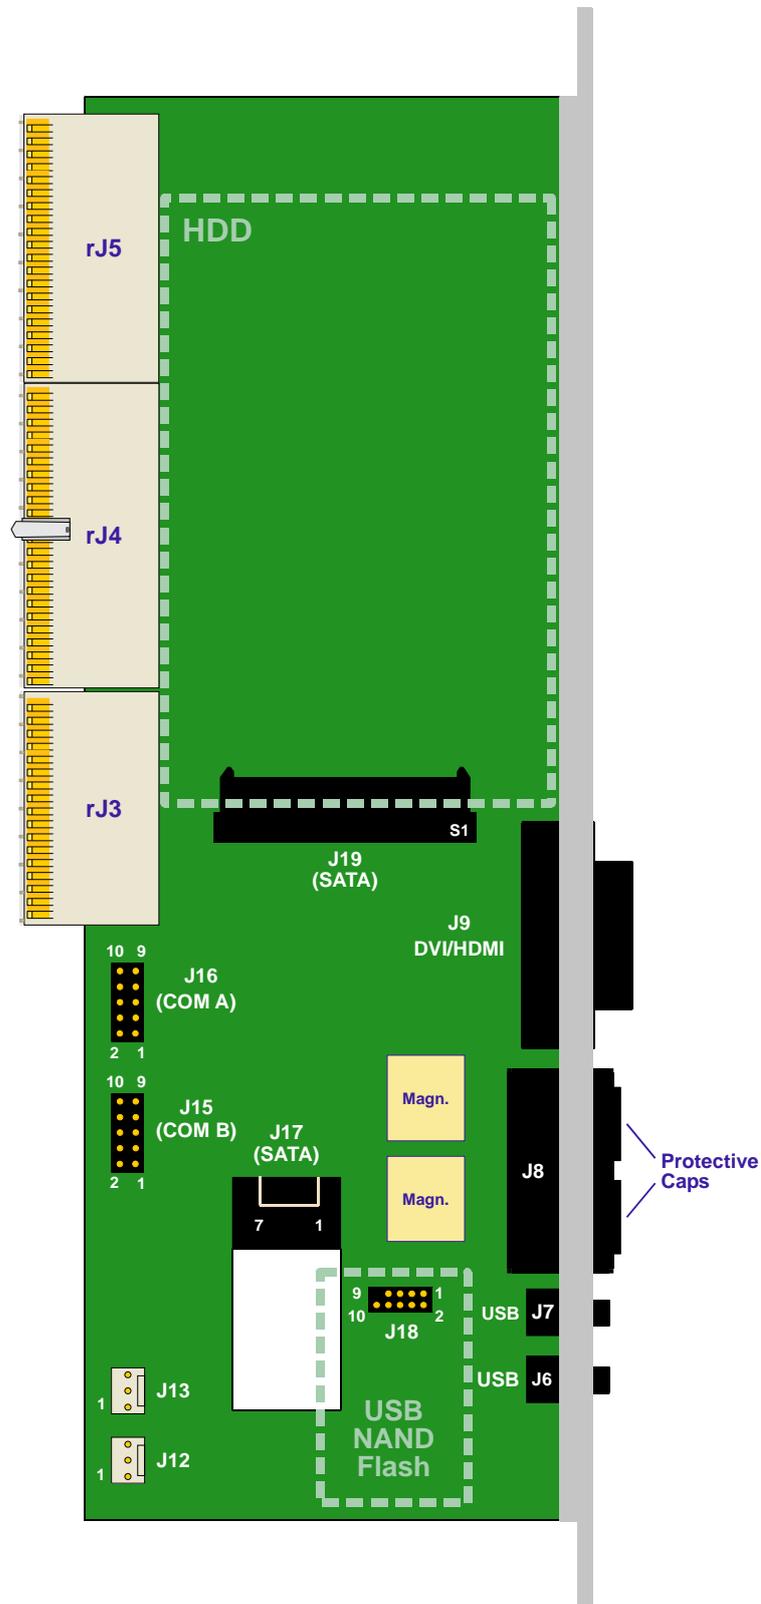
CP-RIO6-001-HD-216 Board Layout – Front View
